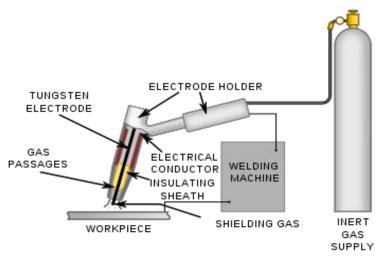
Schematic arrangement of gas tungsten arc welding
